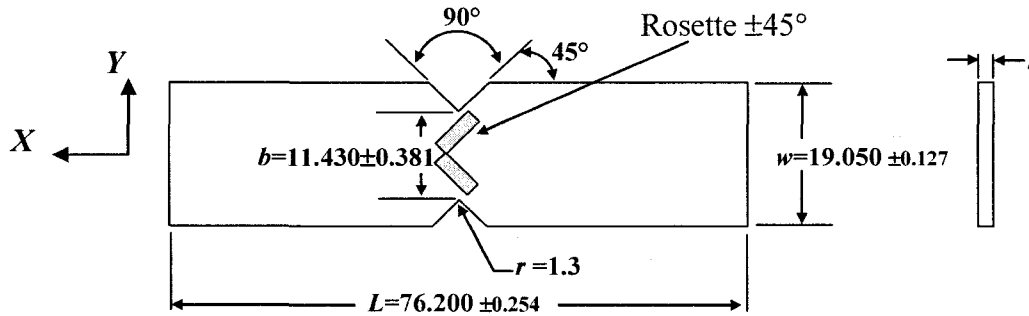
Dimensions in millimeters for a composite sample in shear.
